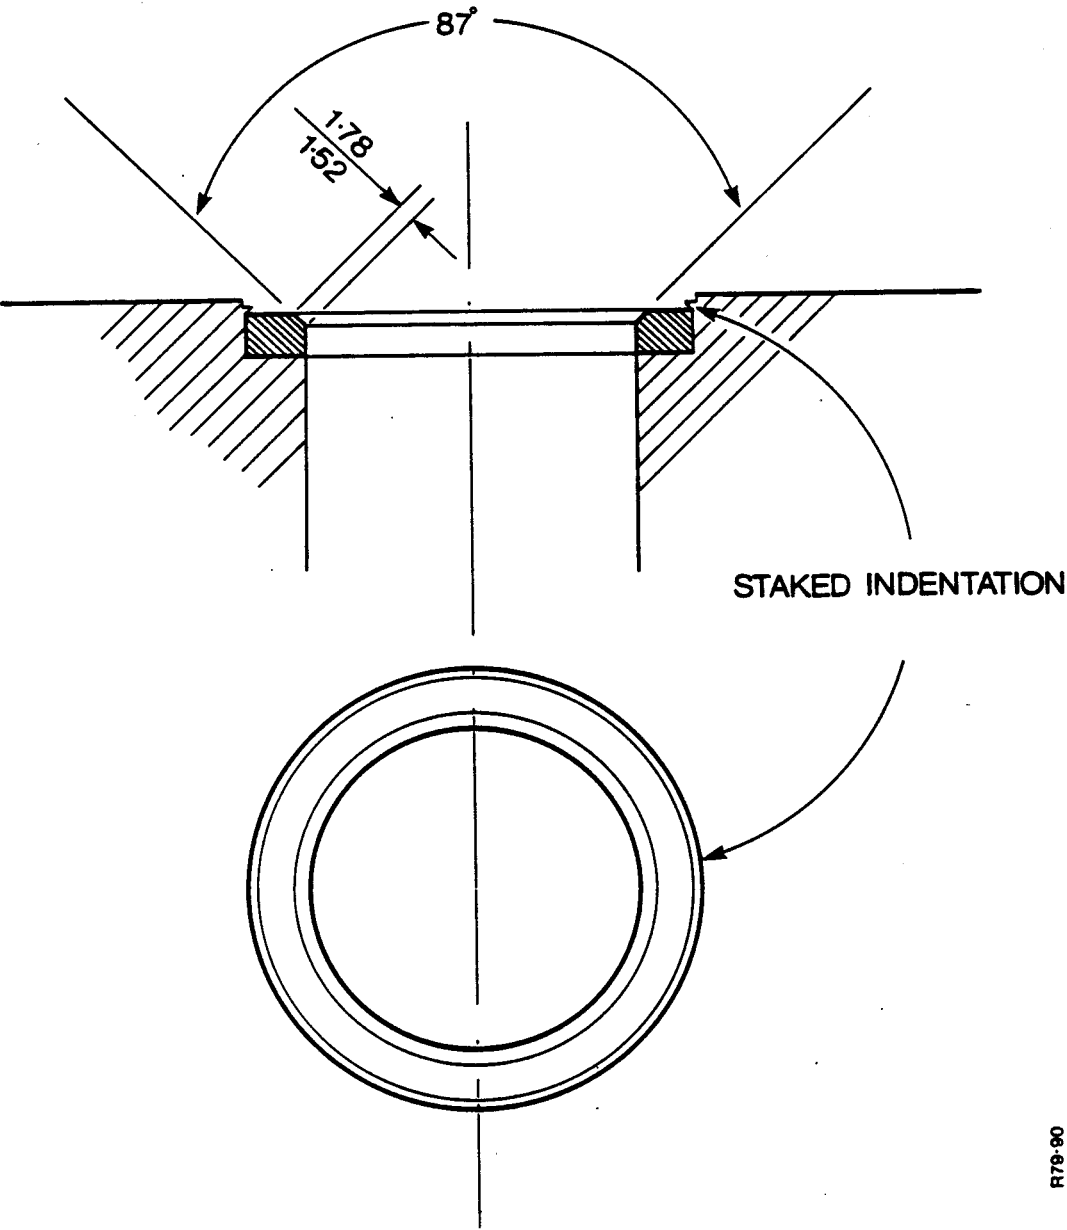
PEENING TOOL FOR CYLINDER HEAD
